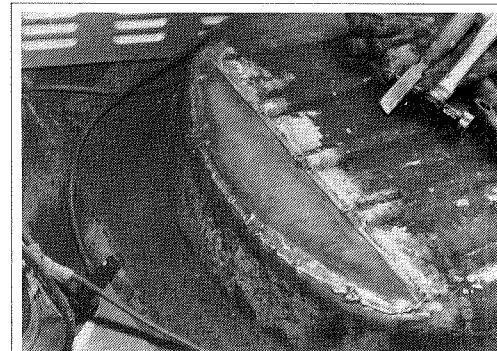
Seam weld to finish, clean up the whole area and then finish off with your favourite paint. The repair join on the inside of the well was treated to a flexible seam sealer prior to further paint.
